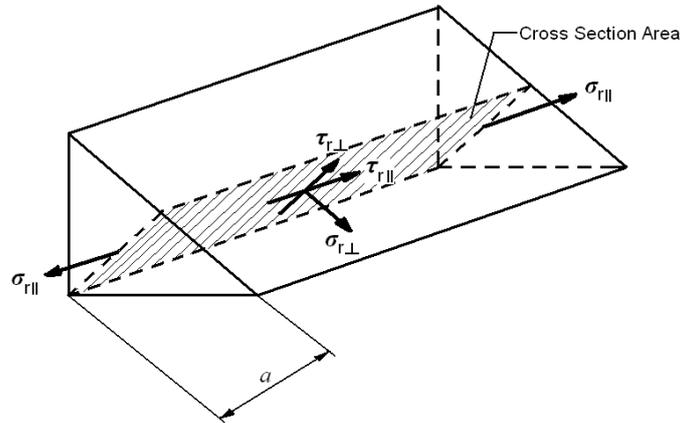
The stress components in the cross section area through the fillet weld.
